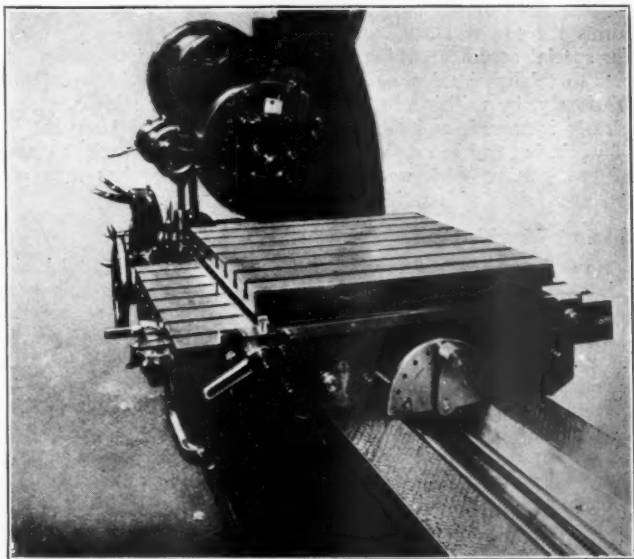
A boring machine fitted with squaring lock and screw cutting adjustment.
